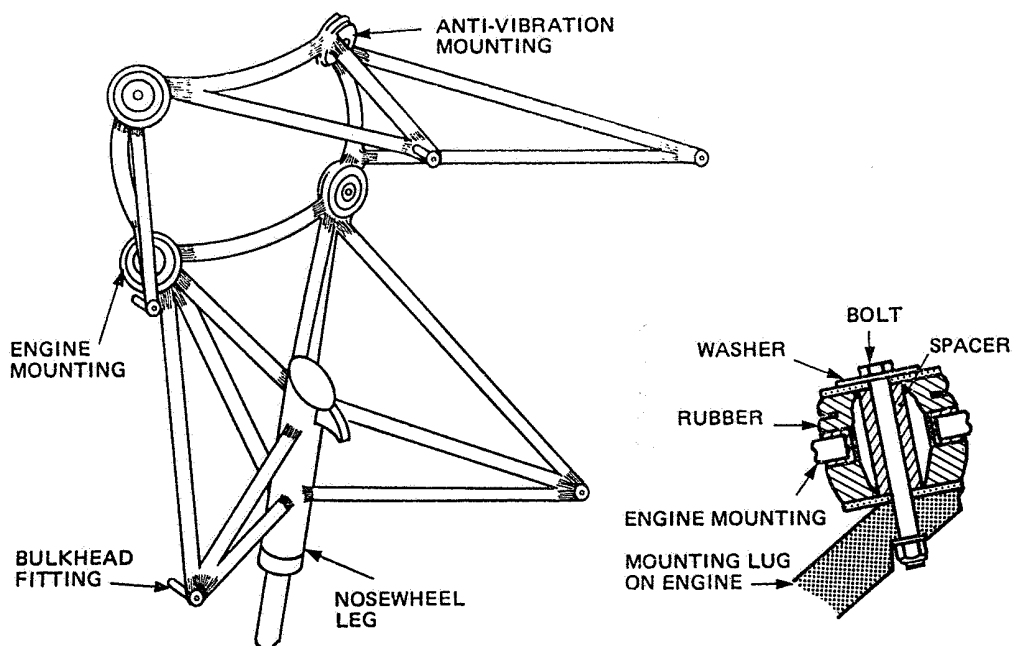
ENGINE MOUNTING FRAME Figure 2 ANTI-VIBRATION MOUNTING
